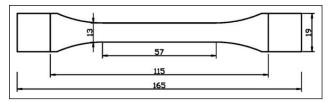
ASTM D638 Type I Tensile Specimen Dimensions [10].
